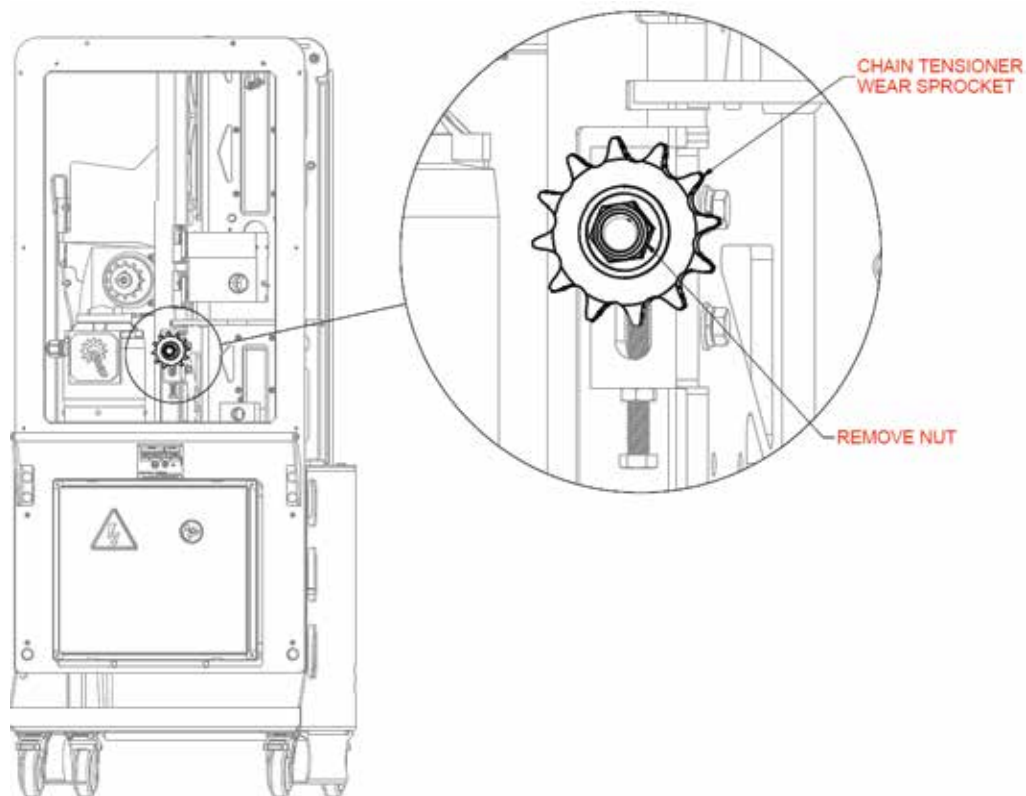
Remove and Replace Chain Tensioner Wear Sprocket.
